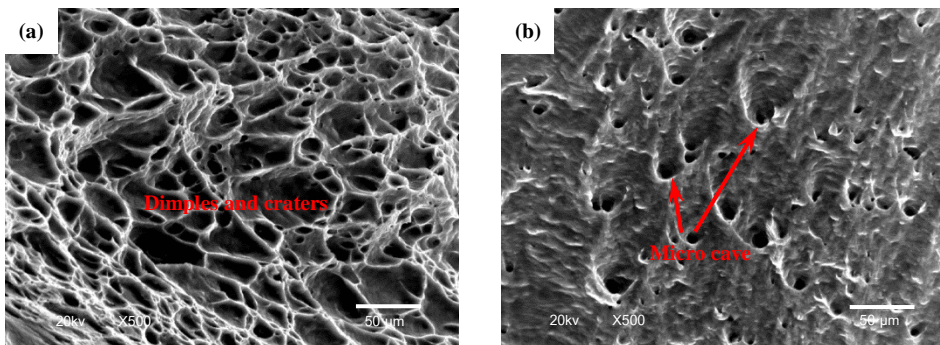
The investigation fracture mechanic of FSSW (a) tool speed to 1576 rpm, welding feed 45 mm·min⁻¹, and dwell time 10 s, (b) tool speed to 660 rpm, welding feed 73 mm·min⁻¹, and dwell time 18 s.
